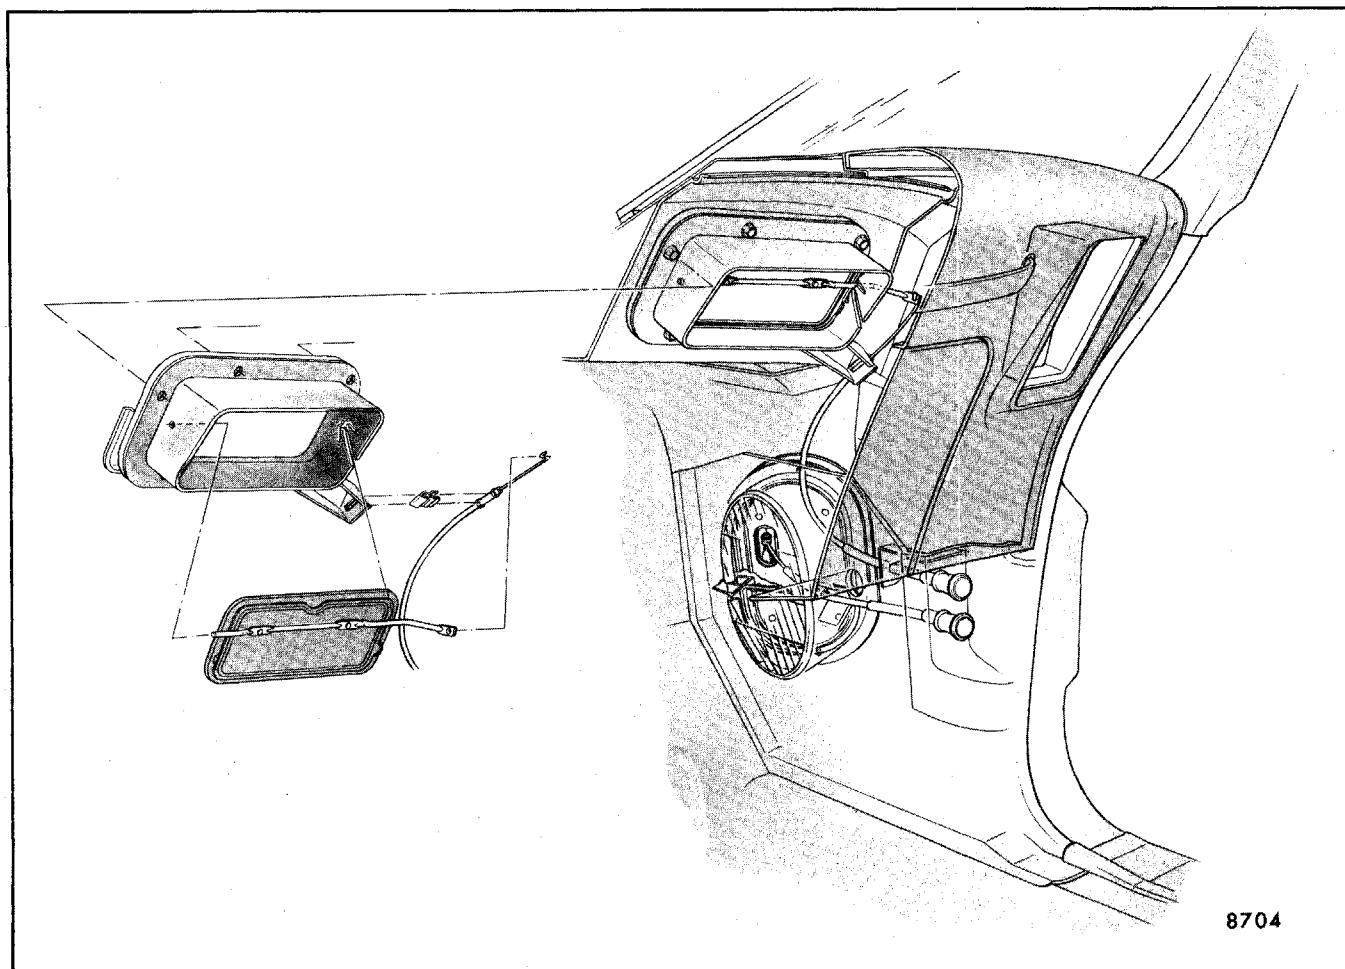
Shroud Center Duct High-Level Air Outlet and Door - "F" Styles
